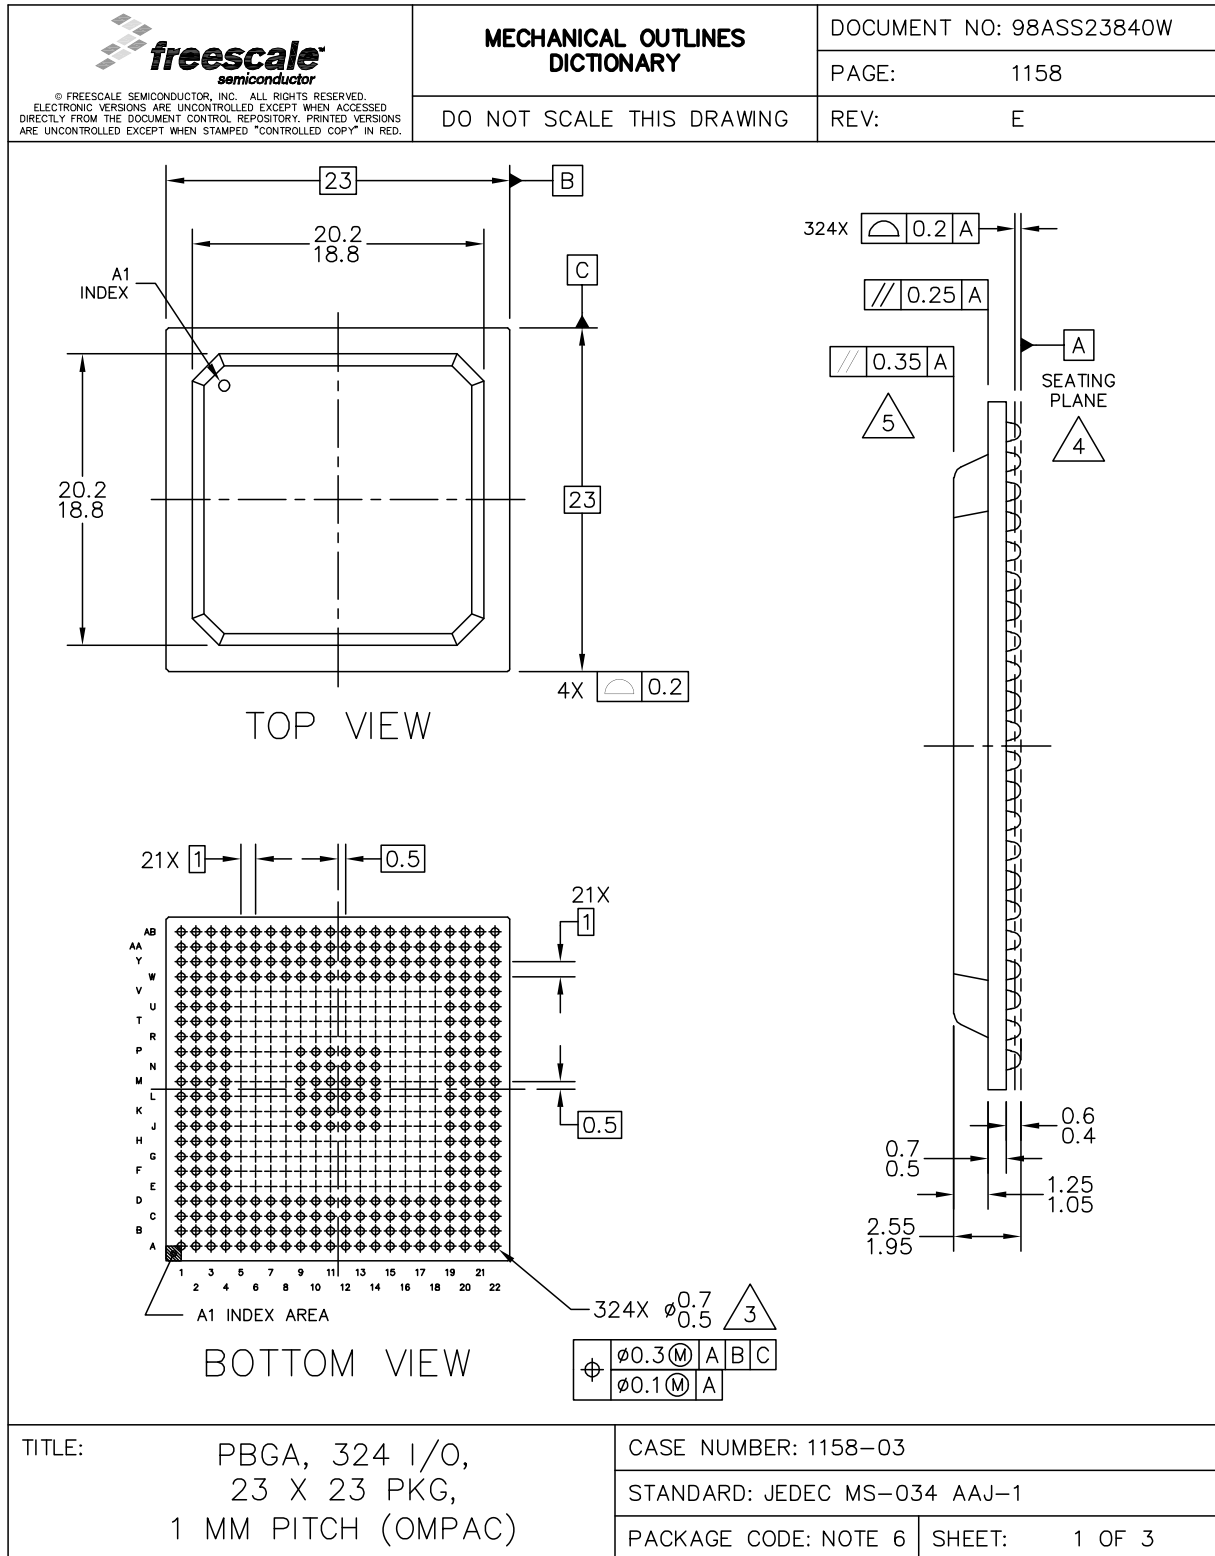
Mechanical Drawing of MPC5125 PBGA (1 of 3)
